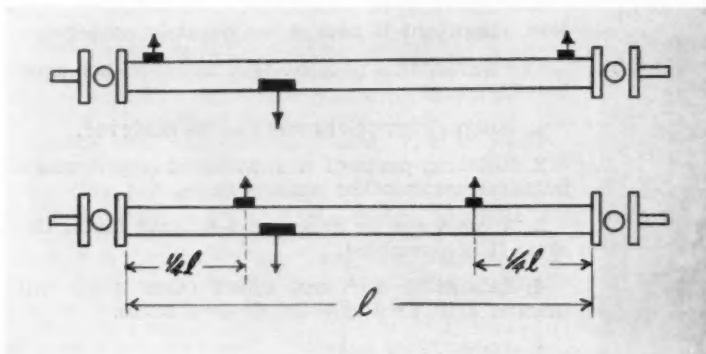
(Upper view) Long distance between unbalance weight near axial center of driveline and counterbalancing corrections in end planes causes deflection of rotor at operating speed. Proper balancing is shown in lower view. Note that best results are achieved by dividing long rotor into three parts and making corrections in the two inside planes. In this manner, distance between any unbalanced weight and the counterbalancing weights is never very great relative to rotor diameter.
